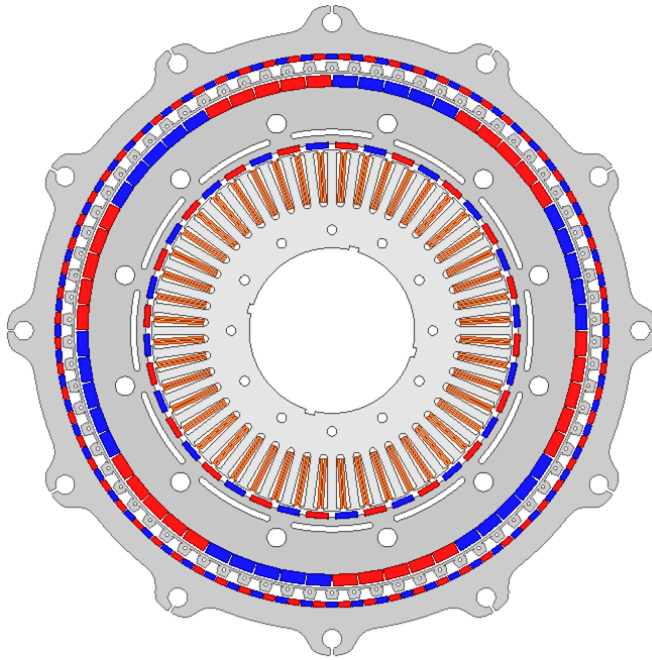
Cross-Sectional View of the Prototype RFMGM Final Design
